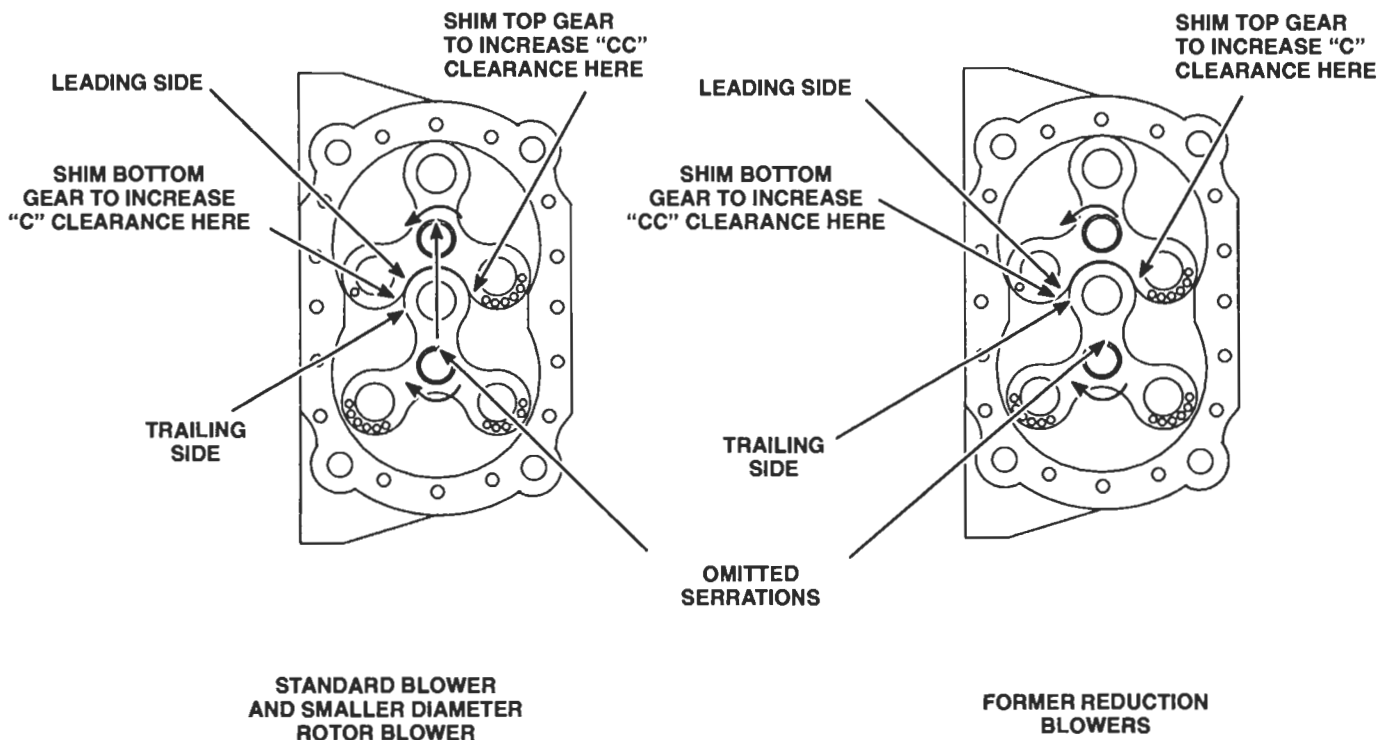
Location of Rotor Lobe Clearance Shims (C and D Engines Shown – A and B Engines Opposite) and End Rotor Clearance
